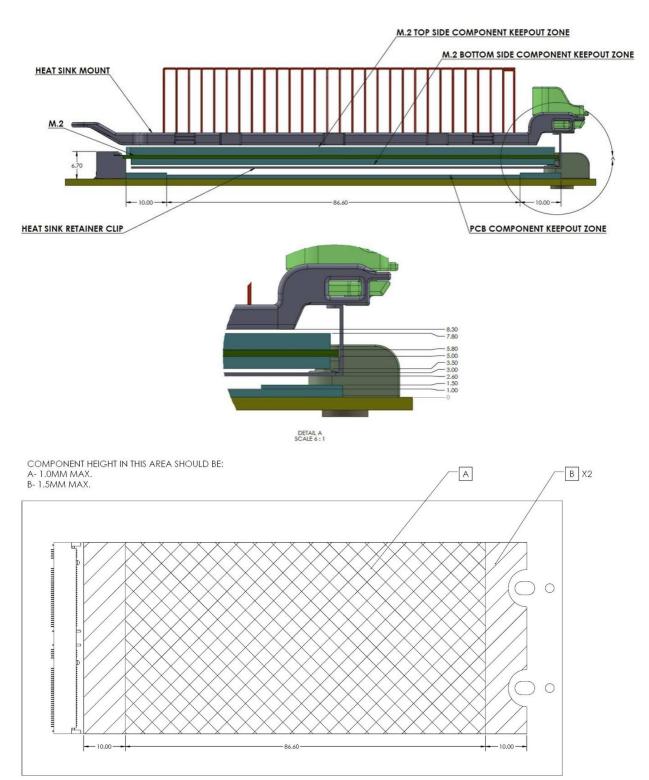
Data Drive Integrated Heatsink Component Keepout
